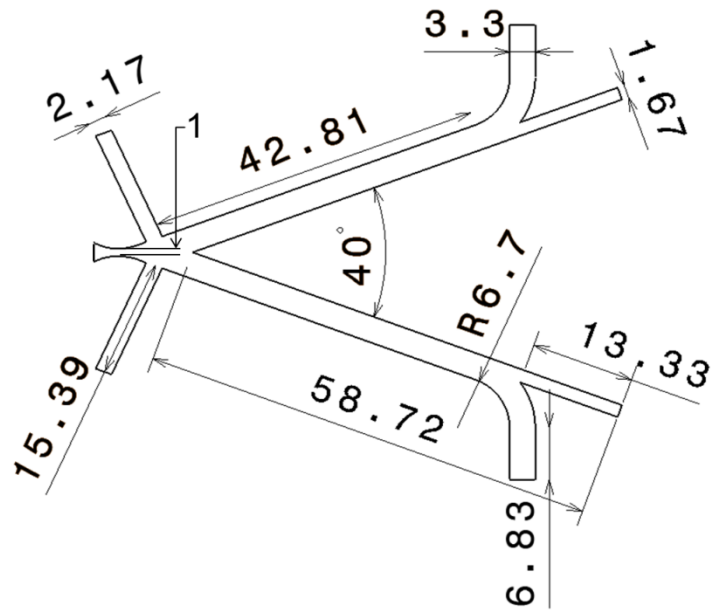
Design of the flow channels in oscillator (dimensions are in millimeters)
